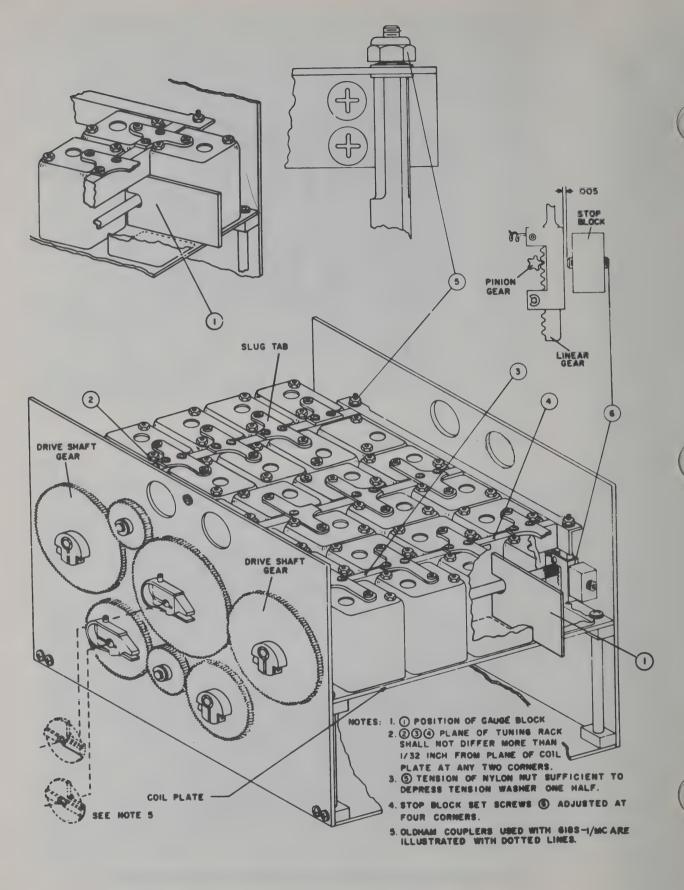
Tuner Subassembly Mechanical Alinement Points
